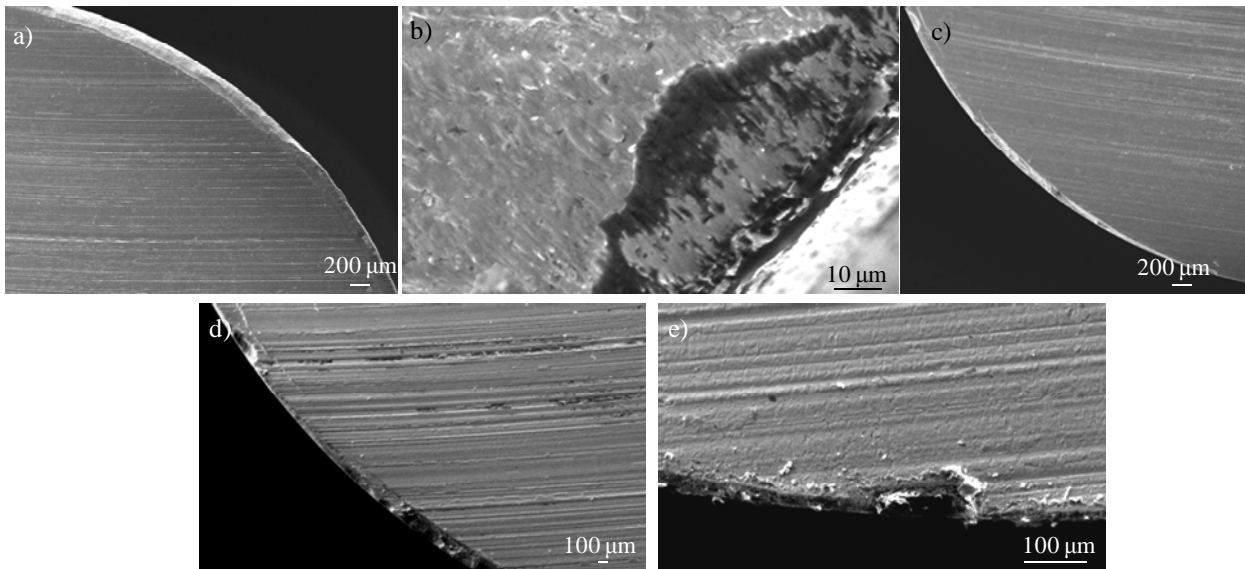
Fractography of an HWS punch: a) rounding of the cutting edge after 17000 strokes; b) wear at the surface after 17000 strokes; c) fractures by chippings at a previously sunk zone after 17000 strokes; d) the same zone than (c) but at 26000 strokes and e) new chipping at 26000 strokes
